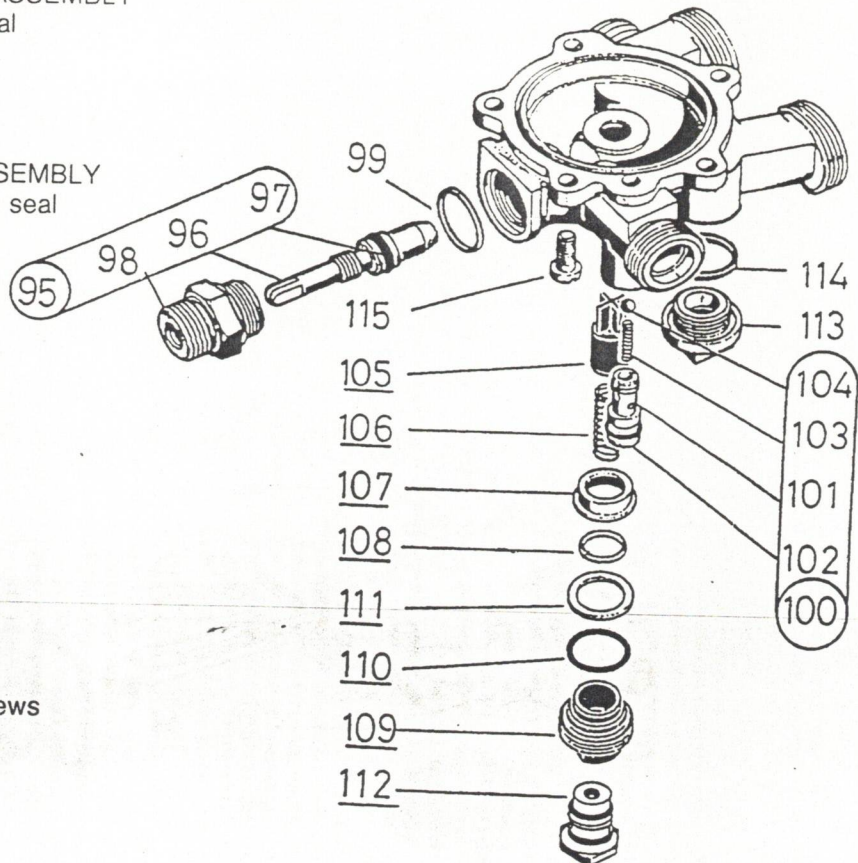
EXPLODED VIEW OF MAINS PRESSURE WATER SECTION
